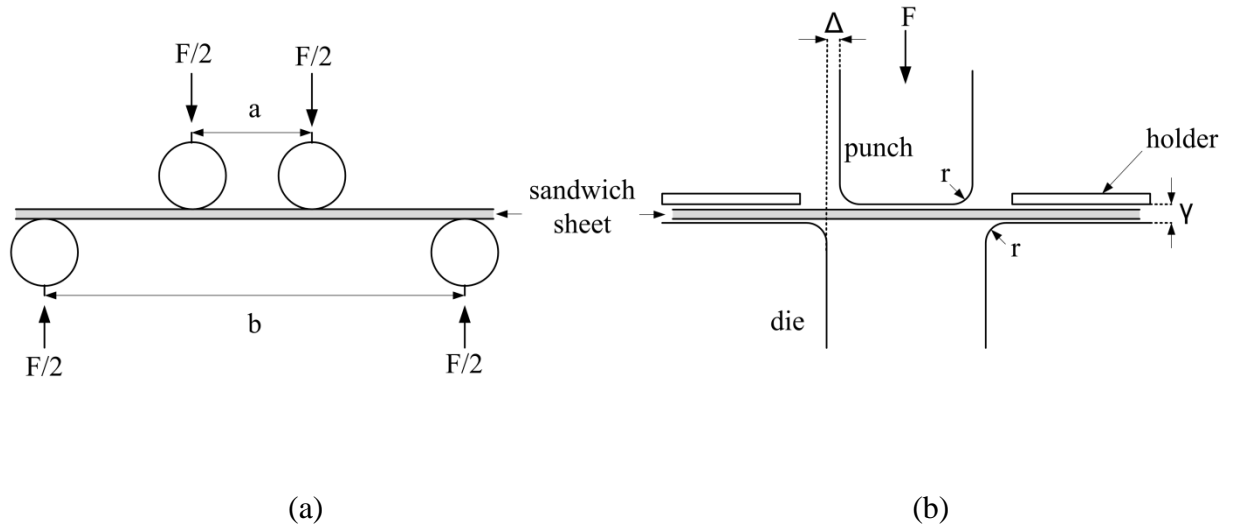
Technical drawing of the experimental set-ups: (a) four-point bending experiment, (b) draw bending experiment.
